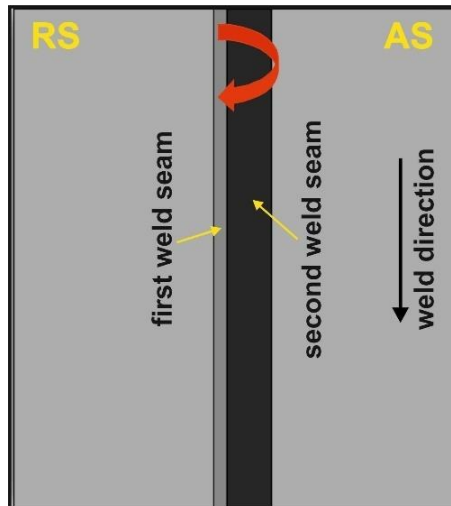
Schematic illustration of weld seam overlapping in a FSW process
